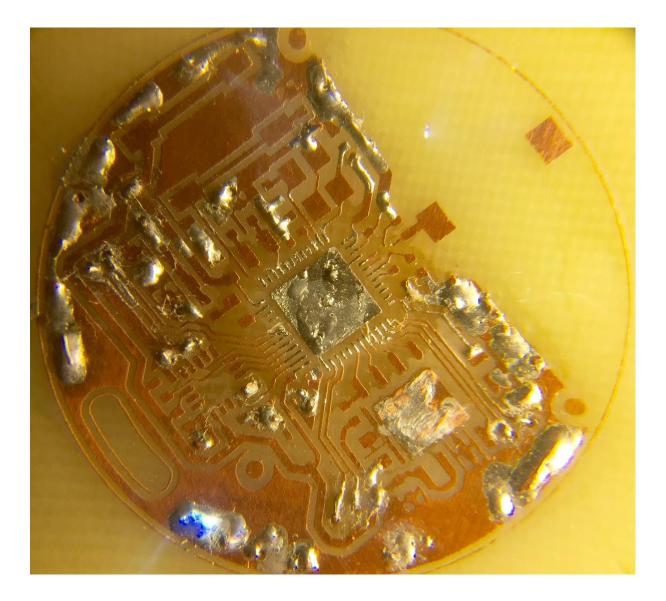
Home-made OpenBeacon proximity tag PCB with solder-paste residue
